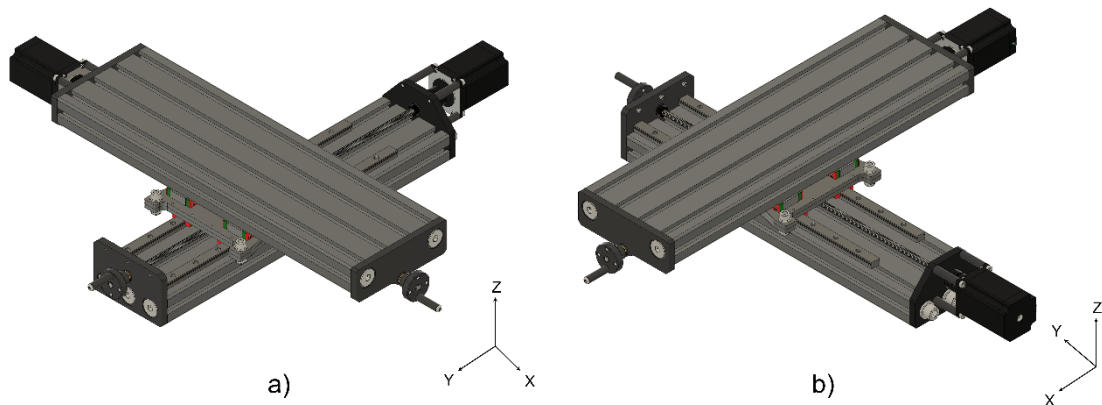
a) Isometric front view of the X and Y axis assembled, b) Isometric rear view of the XY axis assembled.
